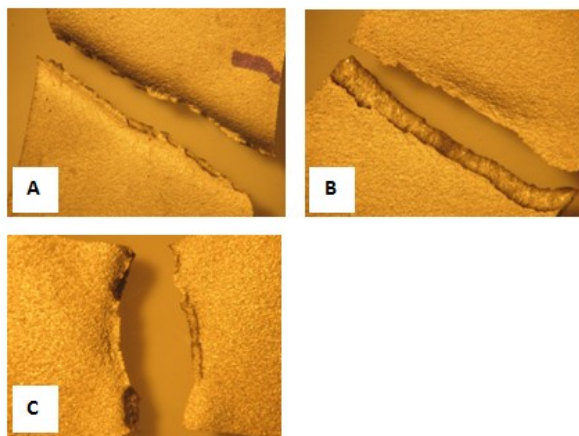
Fracture surface of the (a) AISI 304L, (b) AISI 201 and (c) AISI 441
